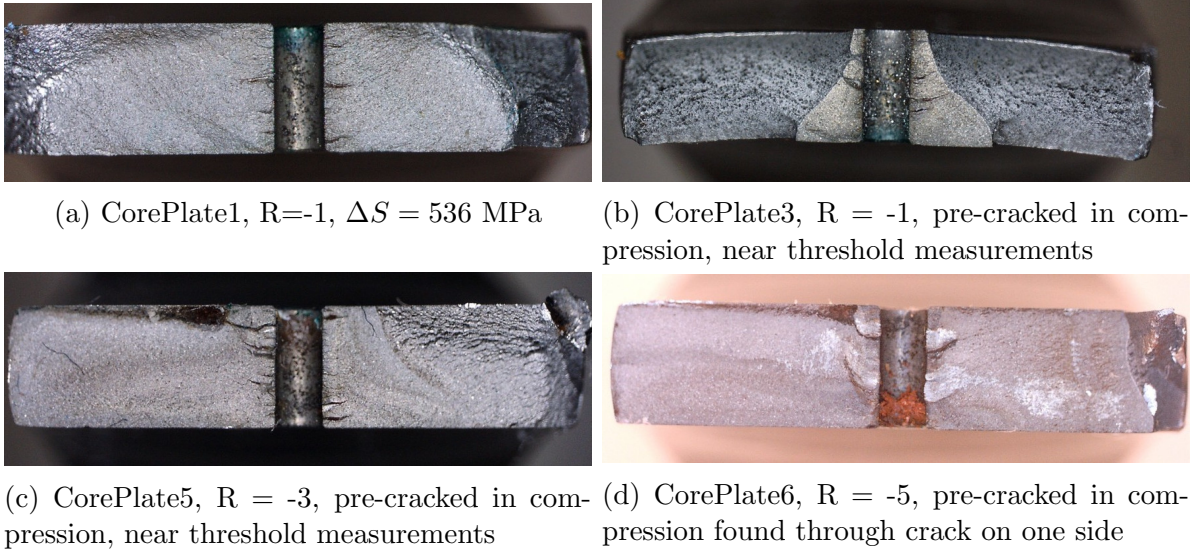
Fracture surfaces of the core notched plate samples
